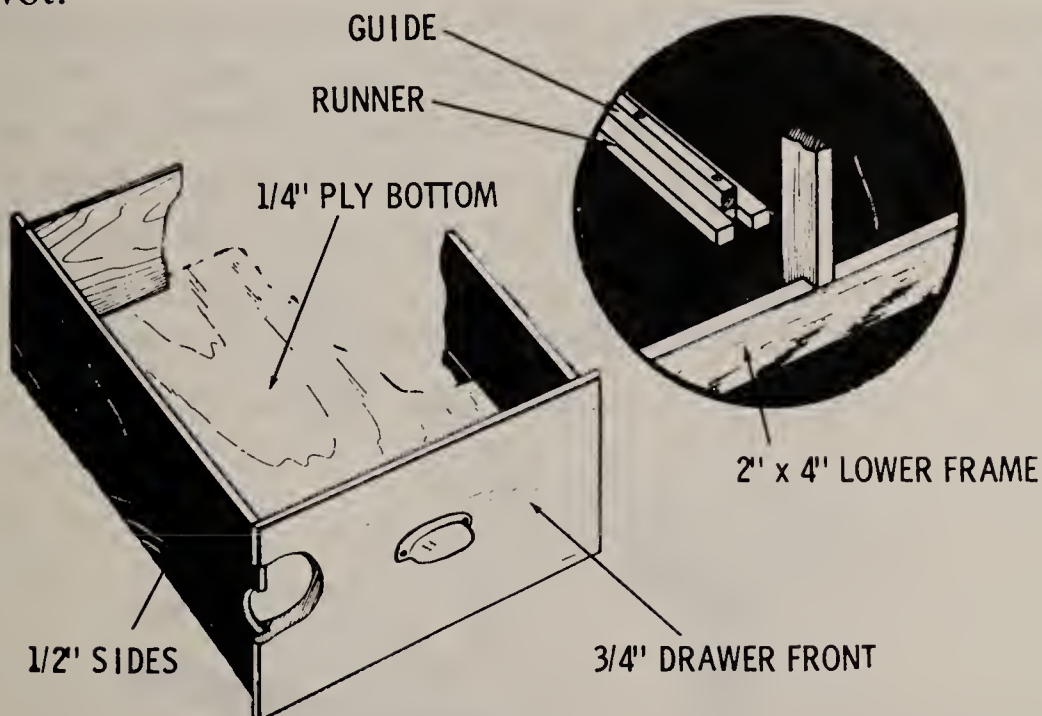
Drawer details for workbench drawer. The guides should be properly fastened in the exact centers of the drawers to prevent jamming.
